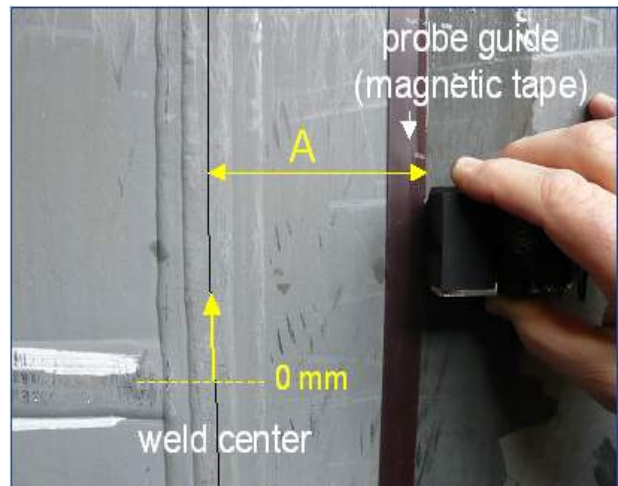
Probe and magnetic tape for weld scanning at constant distance
